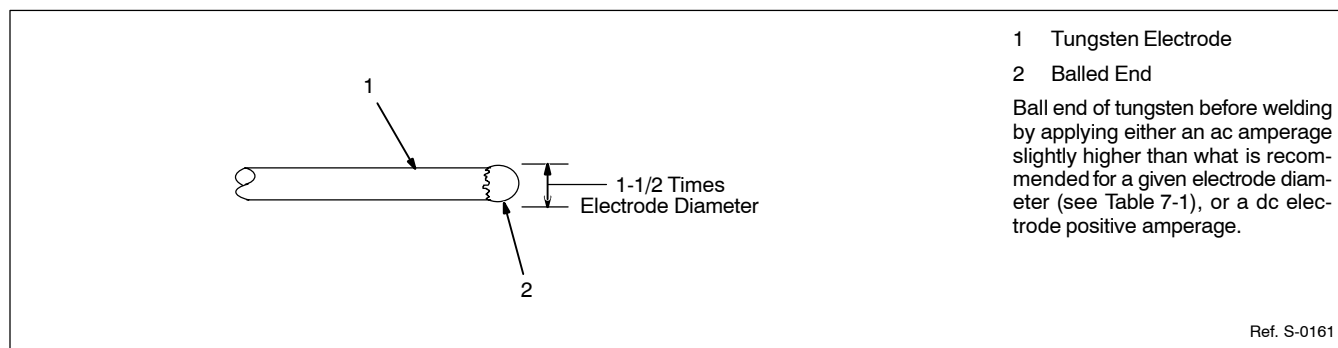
Preparing Tungsten For AC Or DC Electrode Positive (DCEP) Welding
